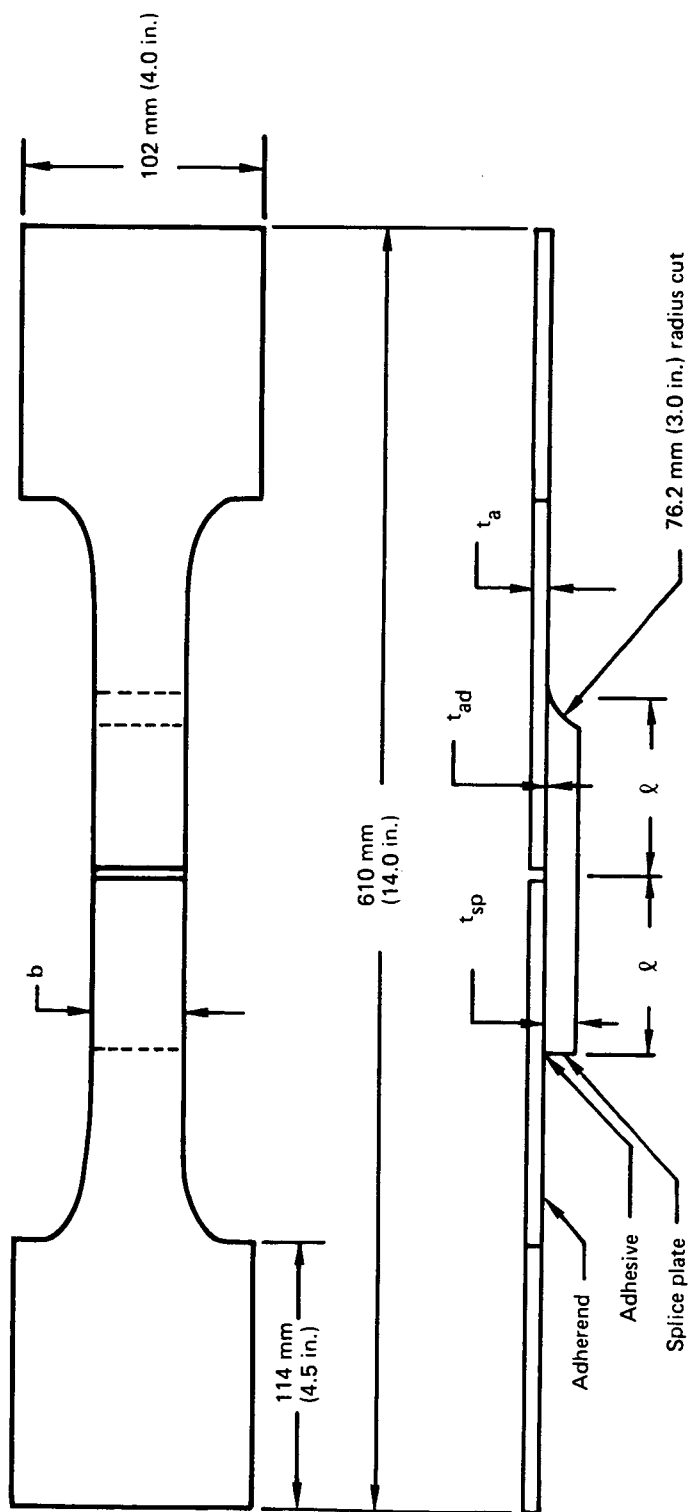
INITIAL TEST SPECIMEN DESIGN
